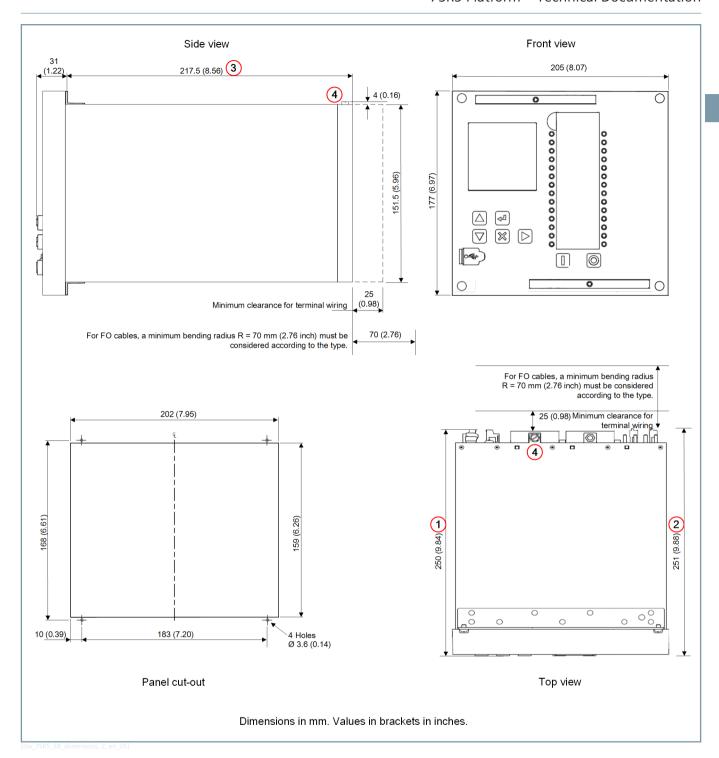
/26 Size 8 Case: Dimensions and Panel Drilling Details
